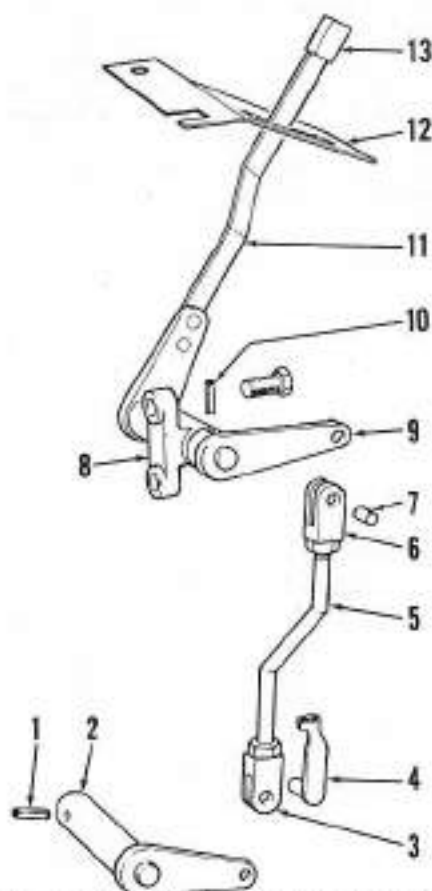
Exploded view showing component parts of the transfer gearbox engagement lever.
